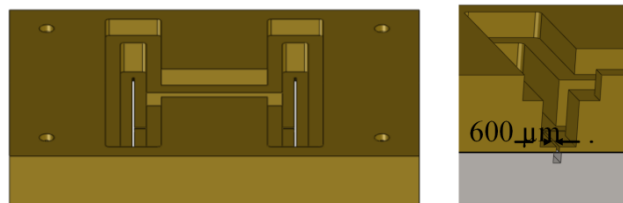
The punch guide. This jig can be aligned with the four dowel pins on the bending jig so that the openings in the guide are precisely aligned with the grooves in the bending jig for punching the plate.
